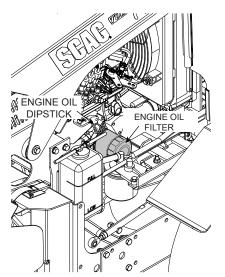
Engine Oil Fill/Dipstick & Filter Location \
